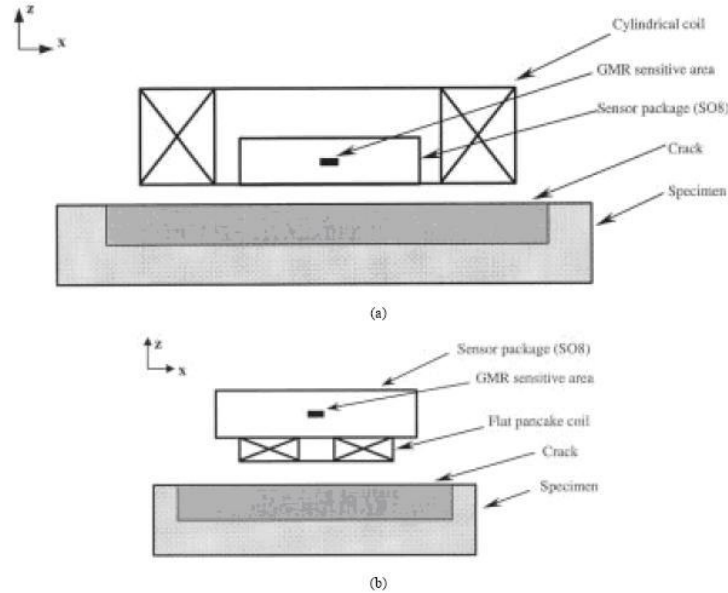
Schematic diagram indicating probe assembly and coordinate system. (a) Cross section of the probe assembly utilizing a cylindrical coil surrounding the sensor. (b) Cross section of the probe assembly with flat coil placed on the sensor package.
